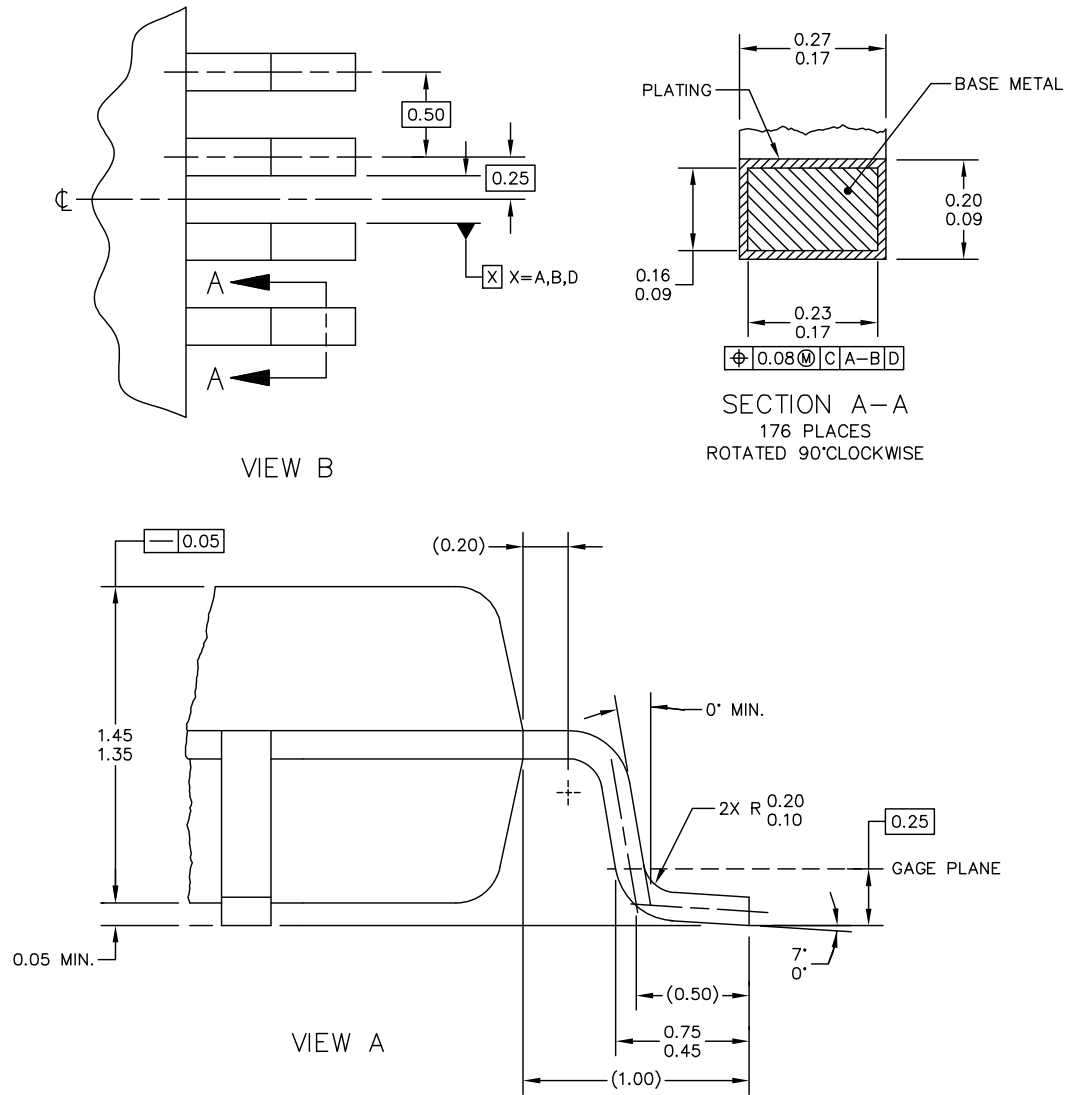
LQFP144 mechanical drawing (Part 3 of 3)
